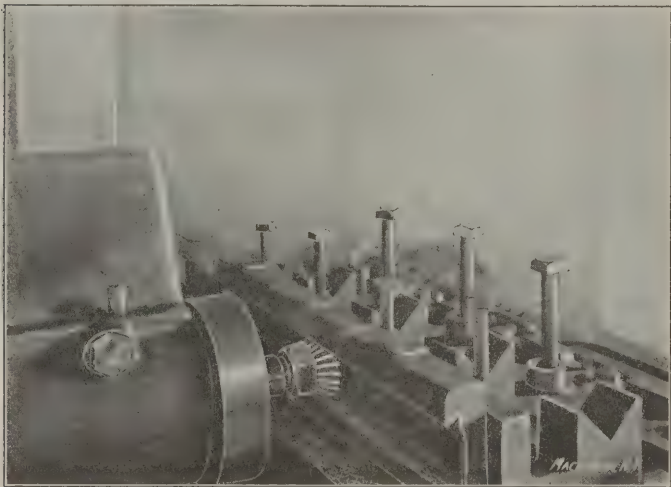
Finishing Slides by Angular Cutter on the Milling Machine.
